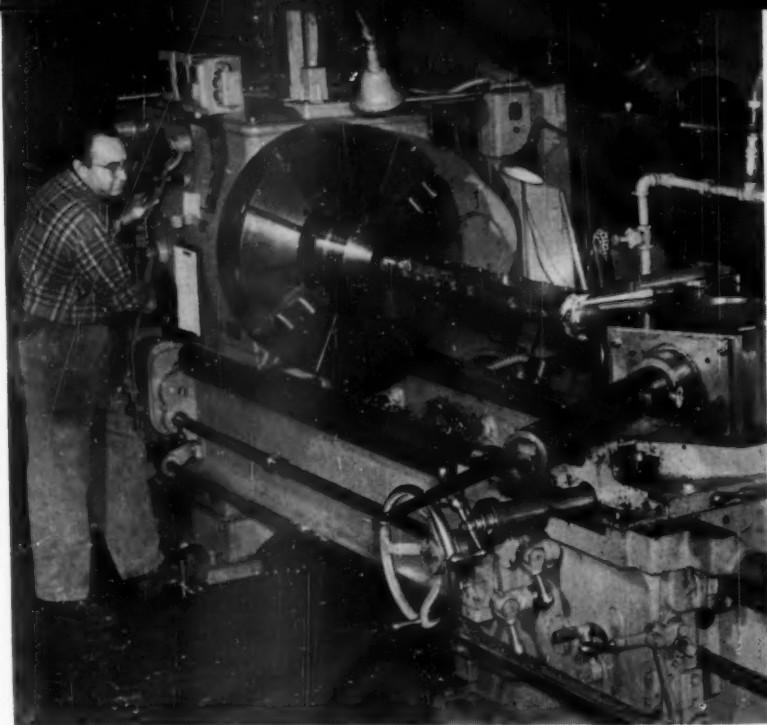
Setup for machining powder chamber. Here contour reamers are being used. Same basic setup is used for boring.
